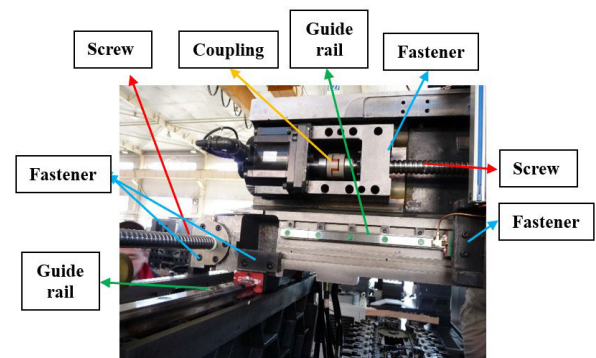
Mechanical transmission mechanism of the CNC machine.
